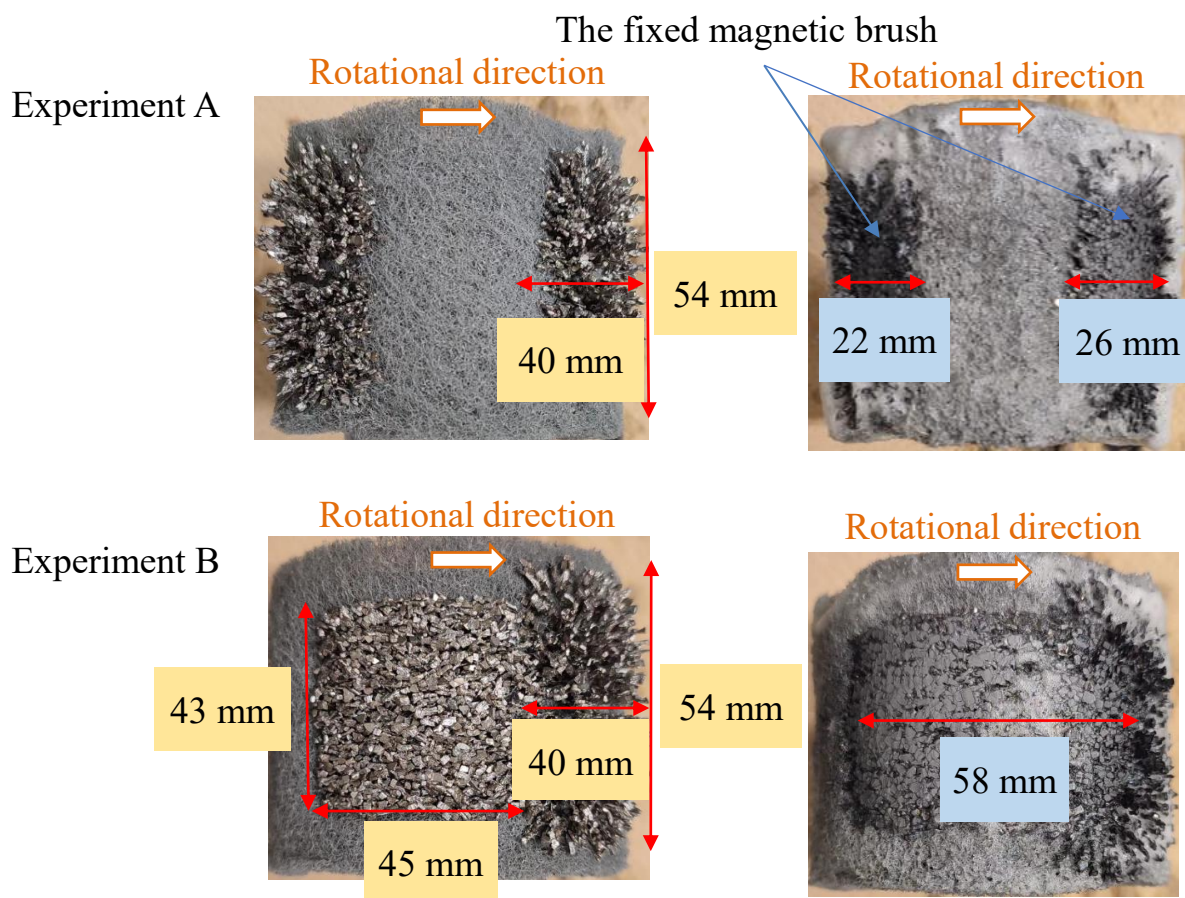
Photographs of magnetic machining tool before and after finishing
